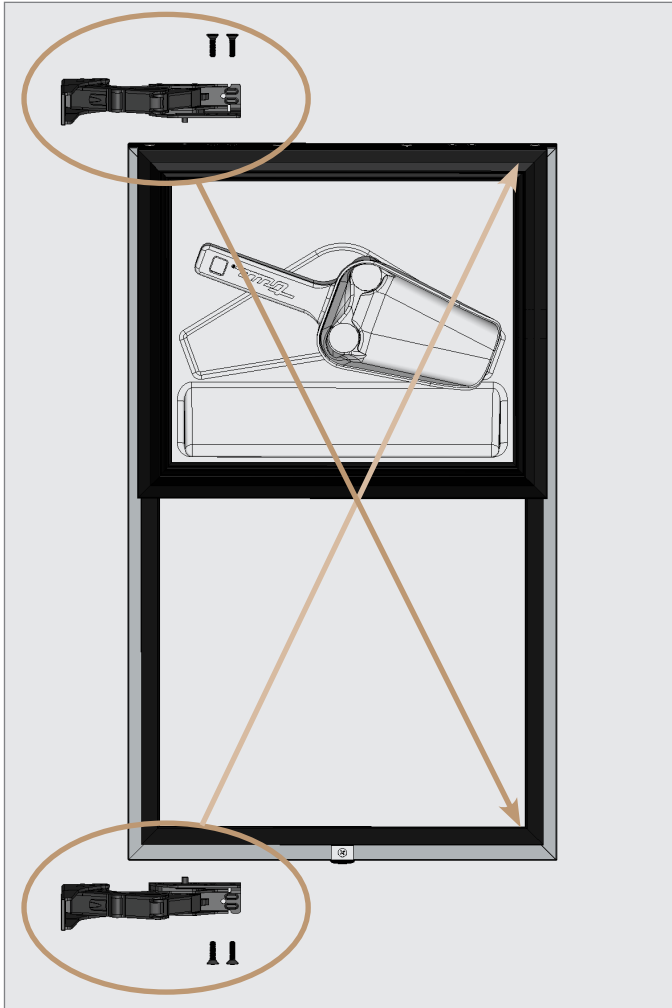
Switch the top and bottom hinge assemblies with each other.
